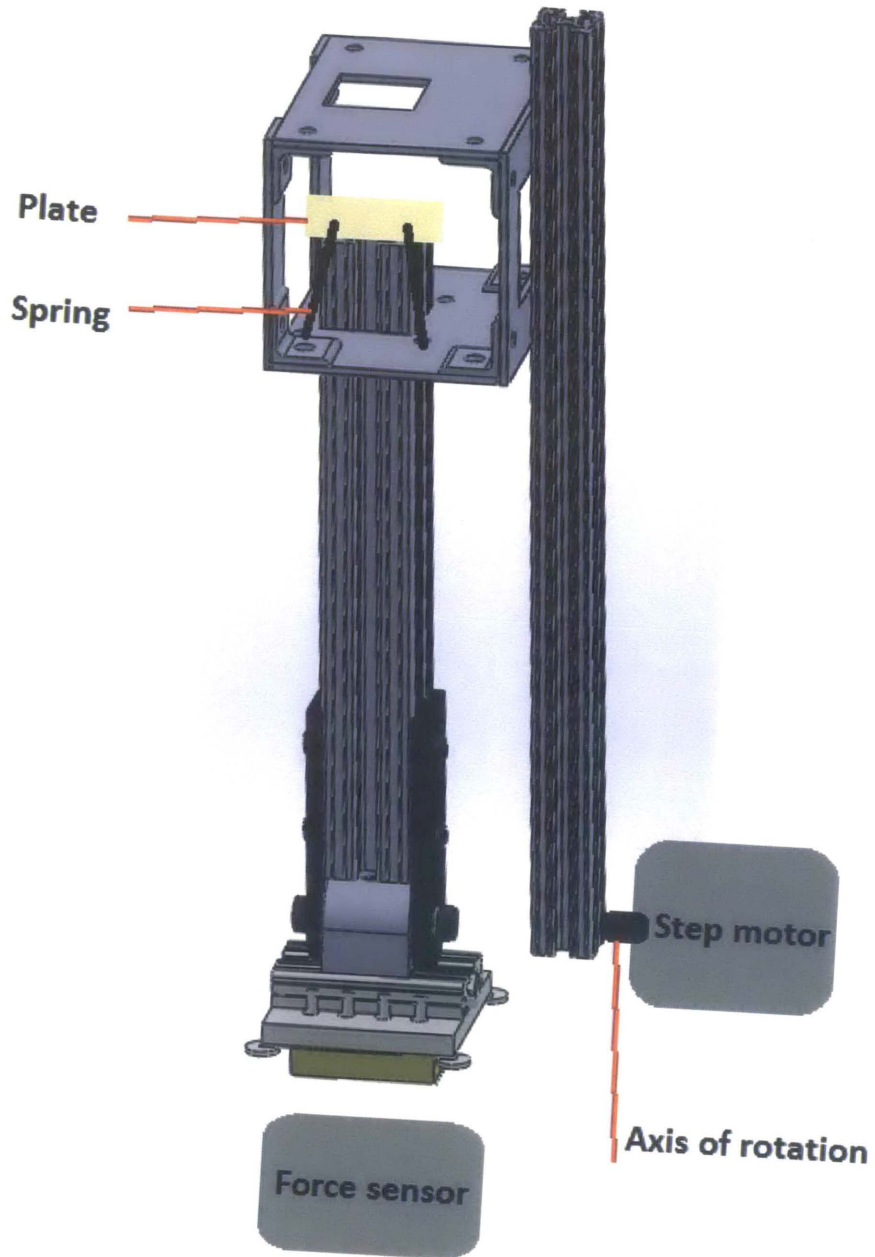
CAD of the slip test structure (CAD of the 80/20 parts are taken from [1])
